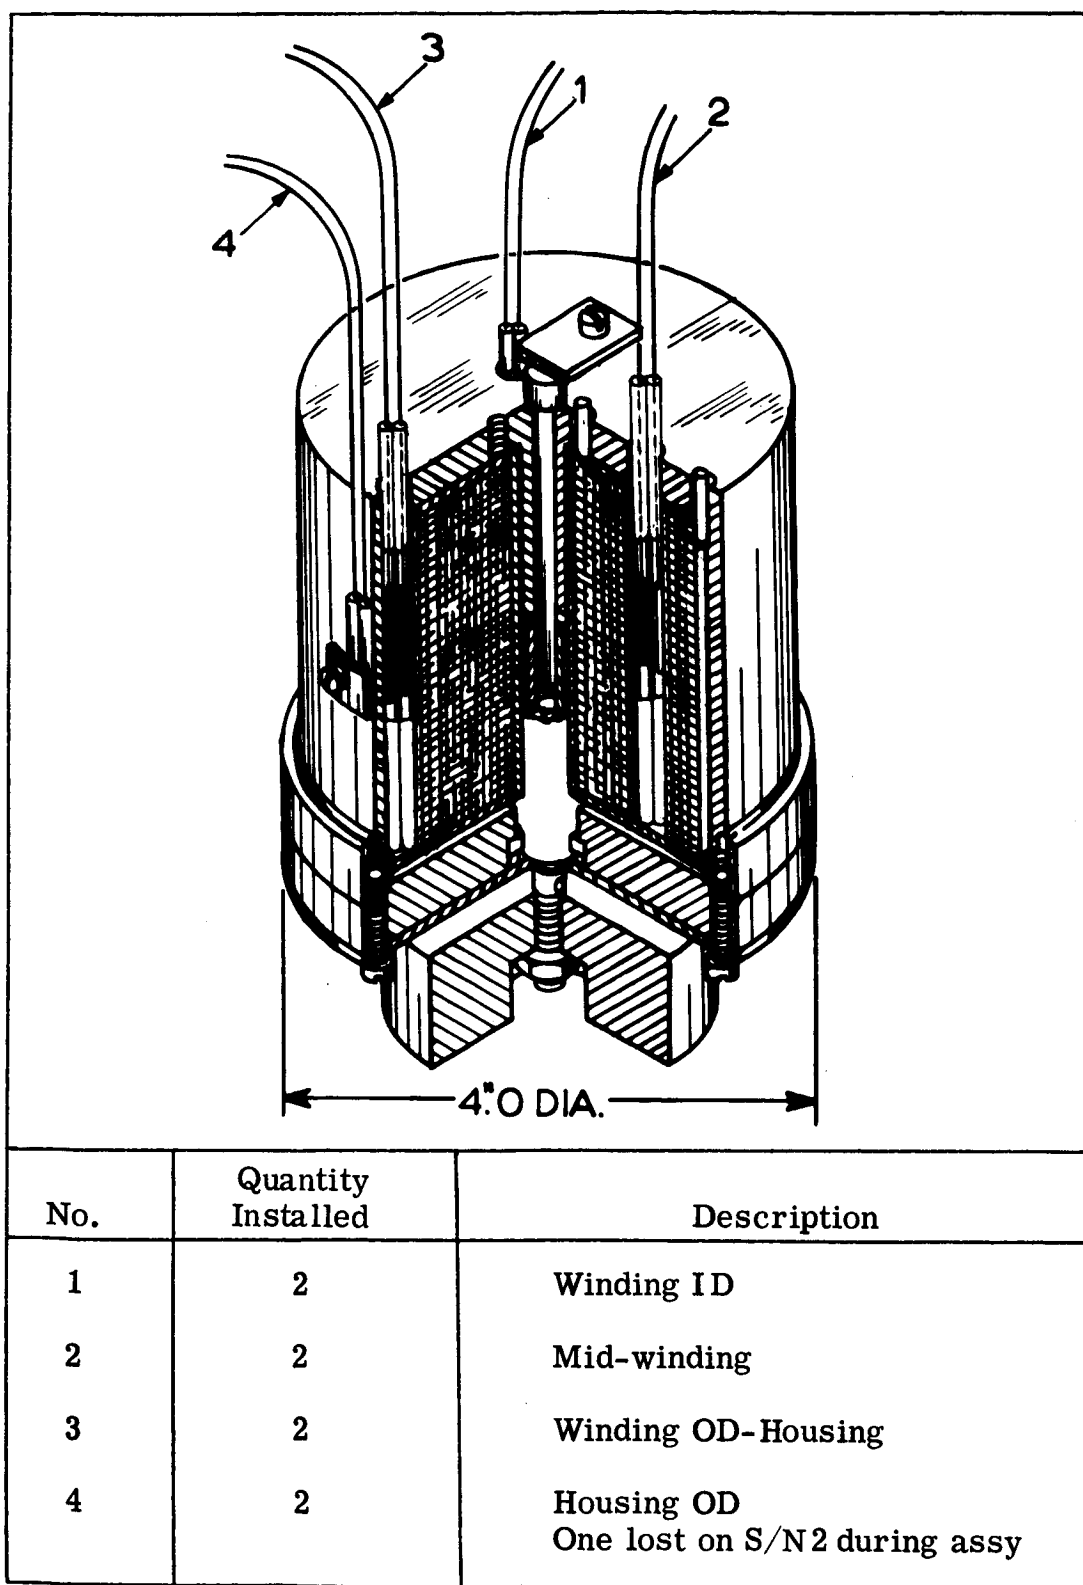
Solenoid Assembly Showing Thermocouple Locations and Junction Positions
